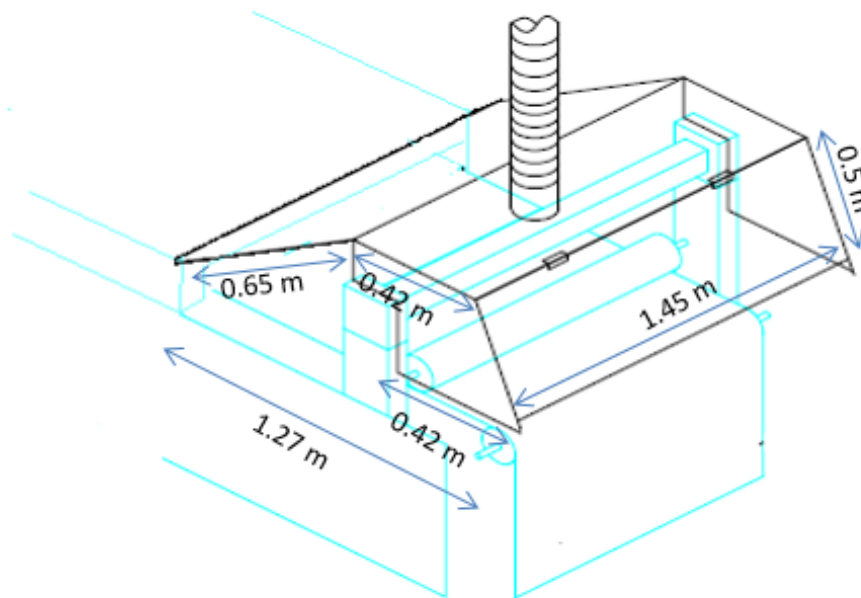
The feature and size of canopy hood around the top of adhesive coating head
